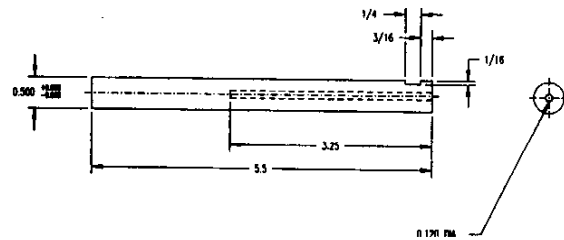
Schematic cross section of the instrumented $\frac{1}{2}$ inch pins showing the axial blind hole within which thermocouples were held in positive contact with the bottom end of the holes to measure metal core temperatures of the pins reliably.
